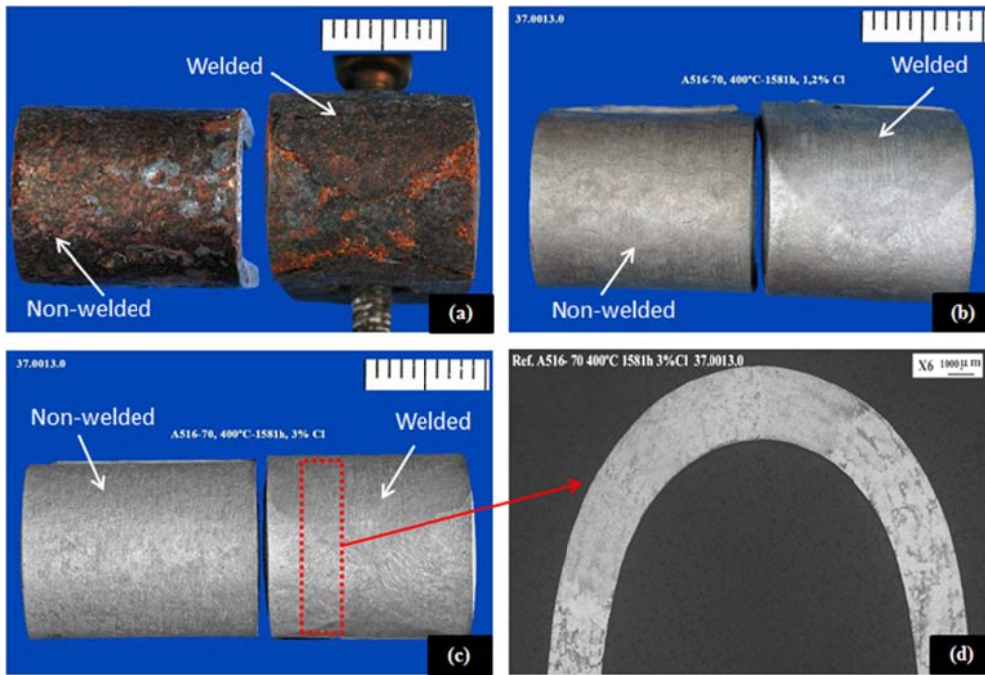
SCC evaluation: (a) Welded and non-welded U-bend coupons after testing, (b) descaled U-bend coupons after exposure to Solar_salt_1.2%Cl, (c) Descaled U-bend coupons after exposure to Solar_salt_3%Cl, and (d) U-bend coupon transversal section microscopy
